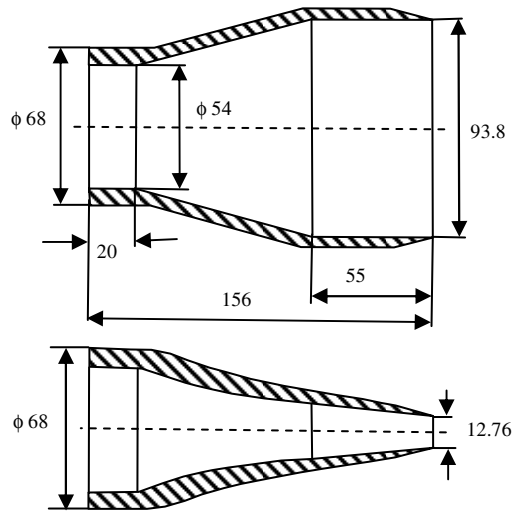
Schematic design of rectangular nozzle (all dimensions in mm).
